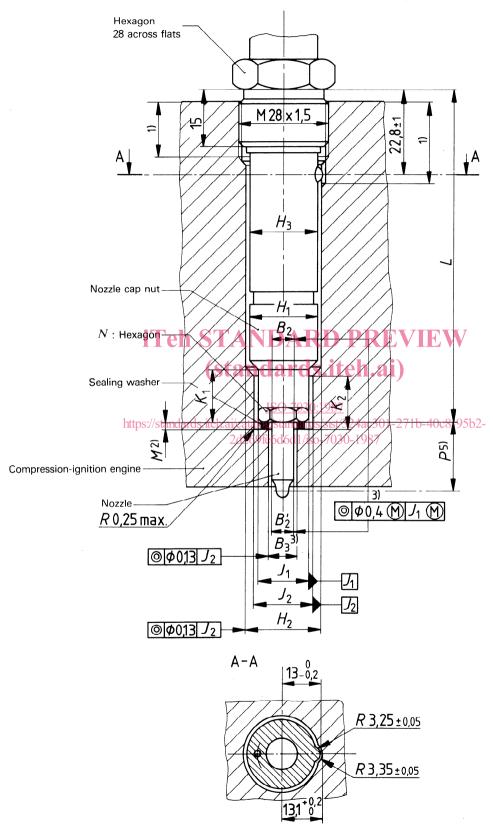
Screw-mounted nozzle holders, types 16 and 17
